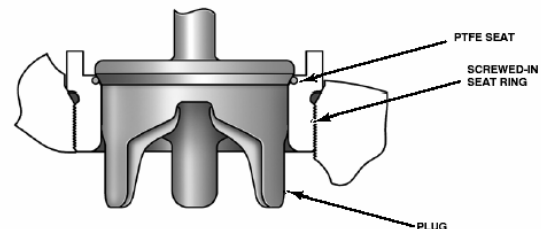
ST Control Valve with Typical Soft Seat Trim Construction (Port Sizes of 36mm - 90mm)
